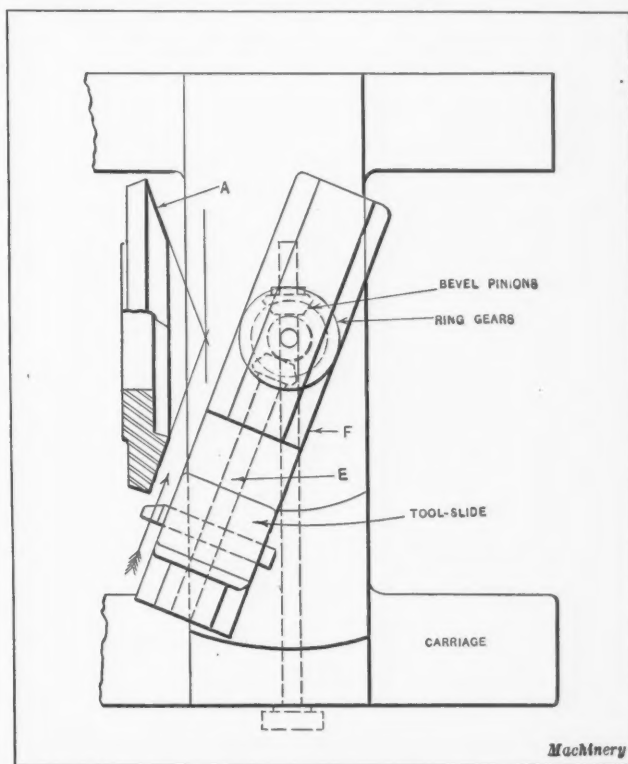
Special Swiveling Cross-slide for machining the Angular Face of the Gear Blanks
